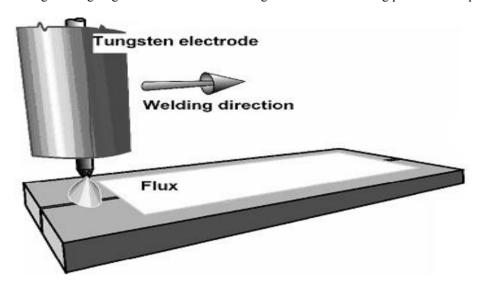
Schematic Diagram A-TIG Welding Process [15]
